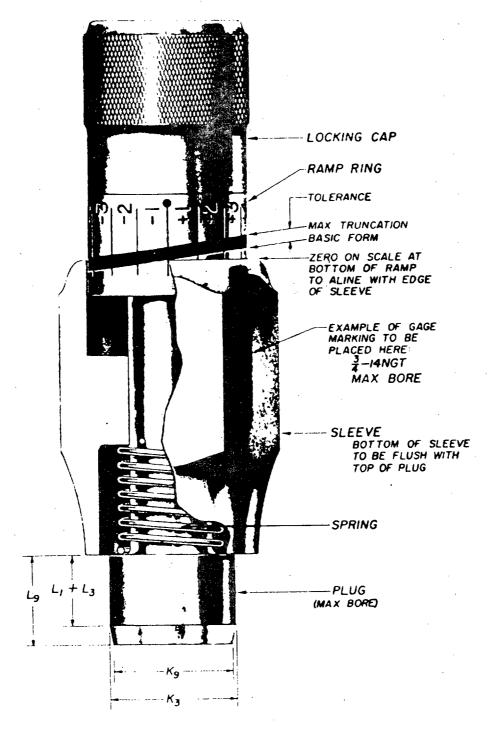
Maximum hore plug gage, NGT, SGT.
